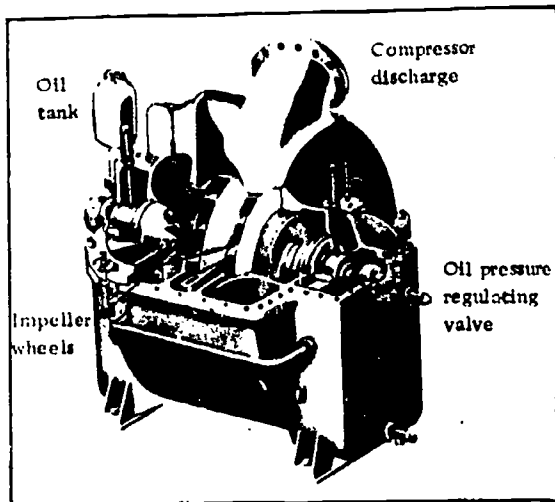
Cutaway view of an enclosed centrifugal compressor.
